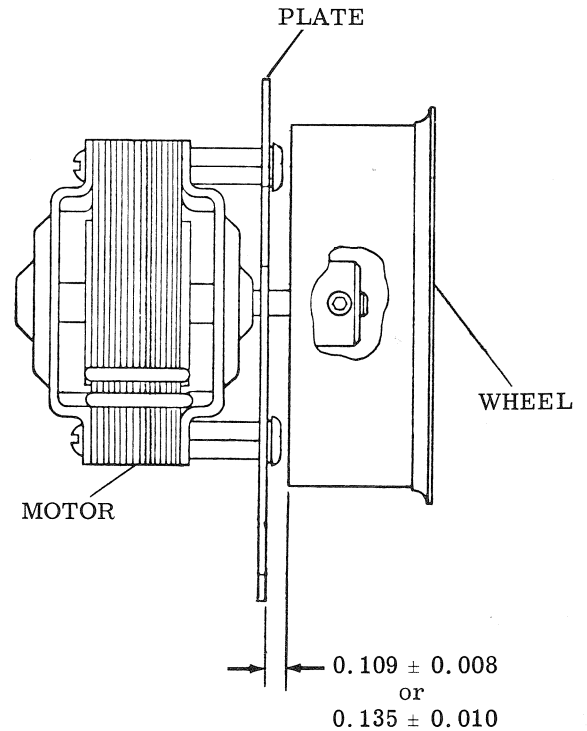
MOTOR MOUNTING PLATE ASSEMBLY
